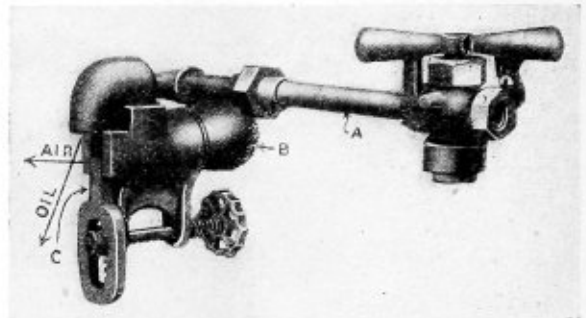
Fuel Oil Type Burner for Welding Furnace
